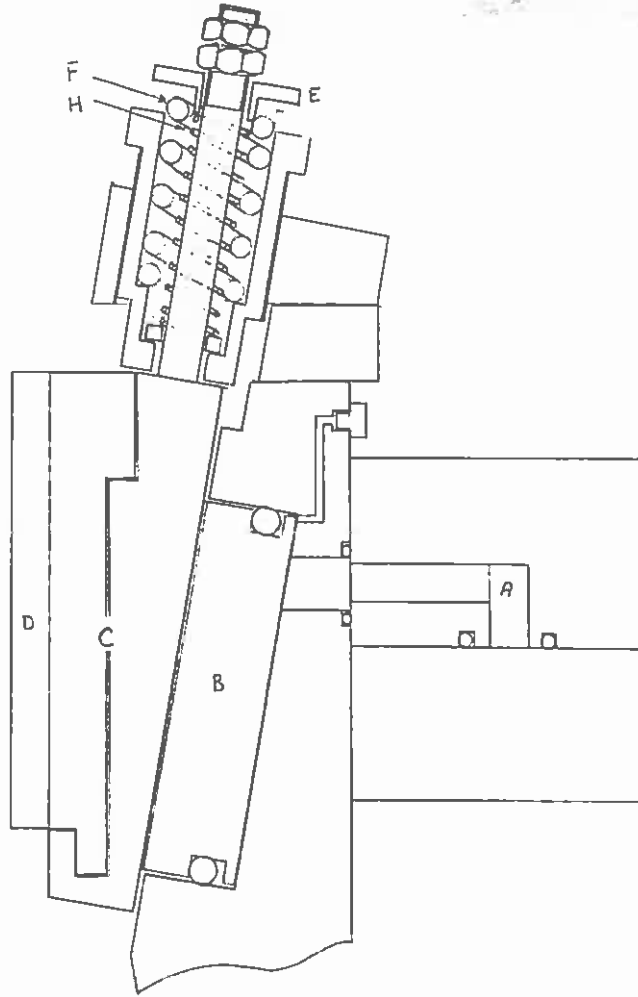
Details of the latching mechanism. One of eight wedge units.
